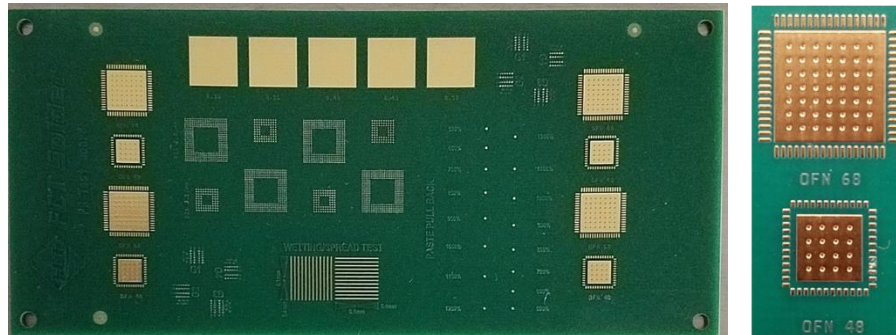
Test Circuit Board for Voiding with Via-in-Pad Designs
